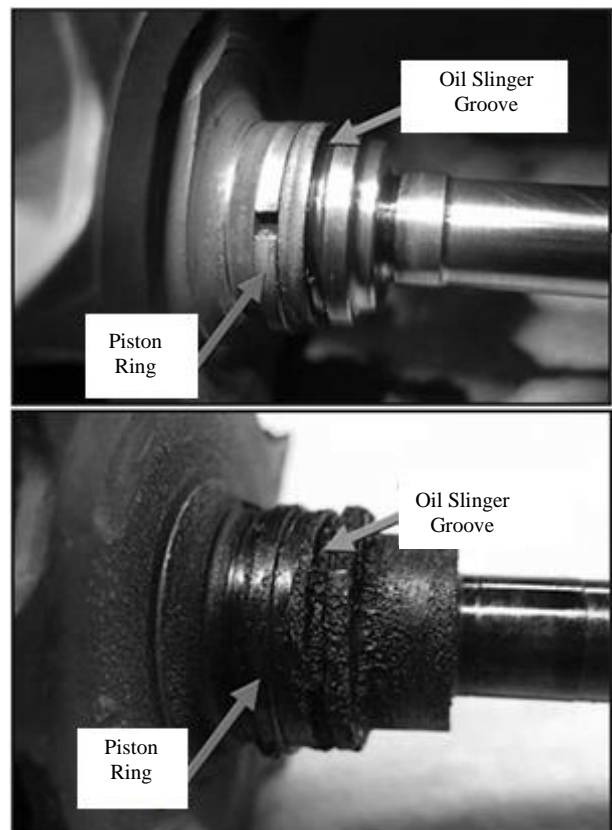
sealing piston ring and oil groove of new turbocharger and oil coking on overheated turbocharger [5]
